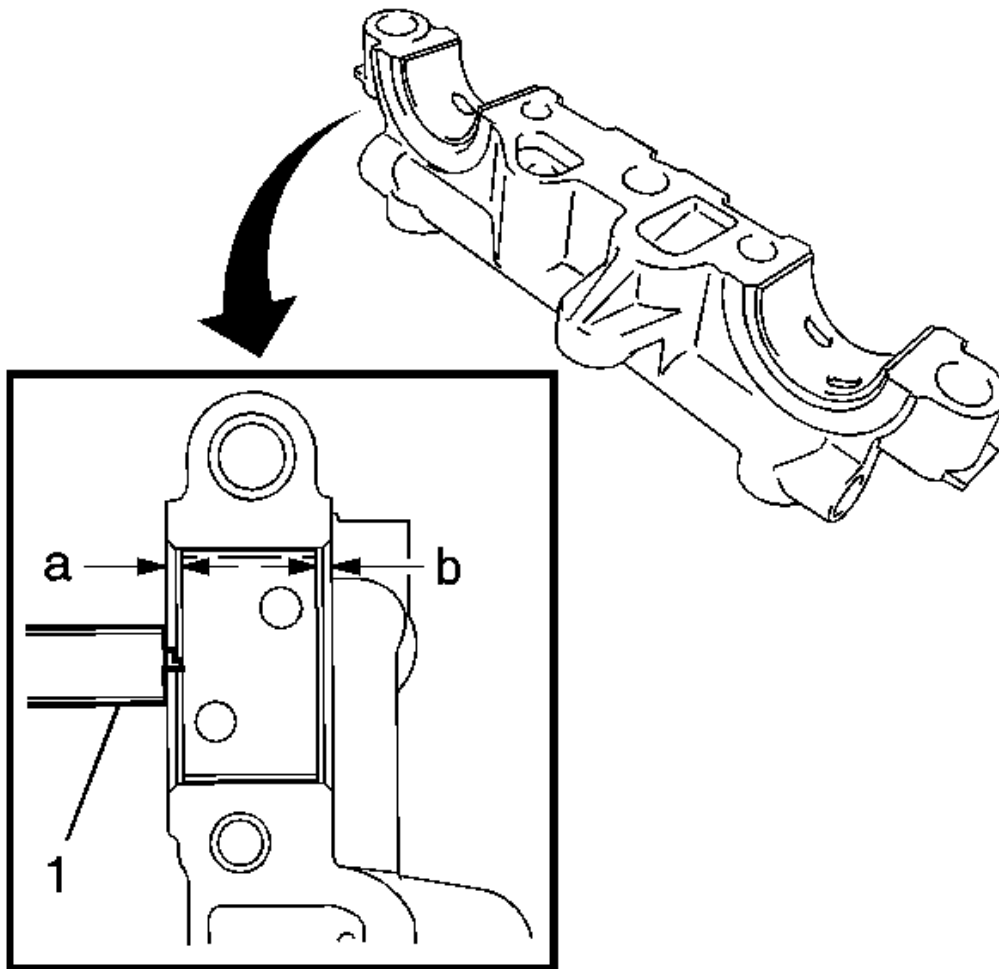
Measuring Distance Between Bearing Cap Edge & Camshaft Bearing Edge
